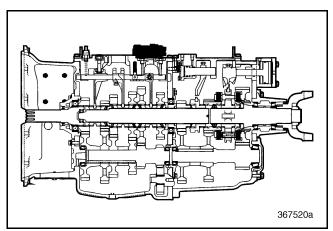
Range Shift Valve Component Locator (T313L21/T318L21 Shown)
